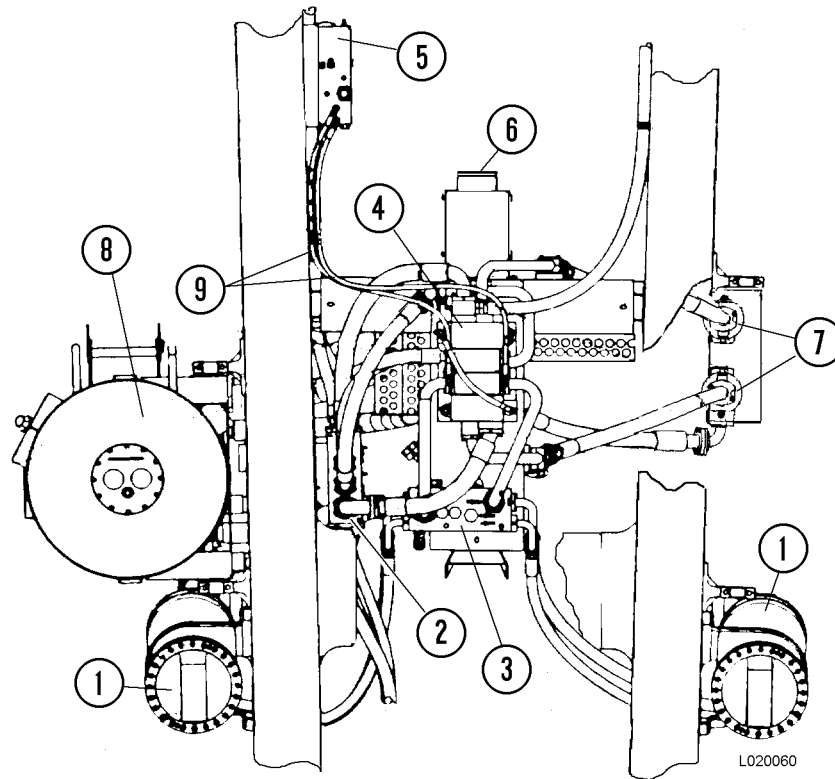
HOIST PUMP PIPING (Top View)
